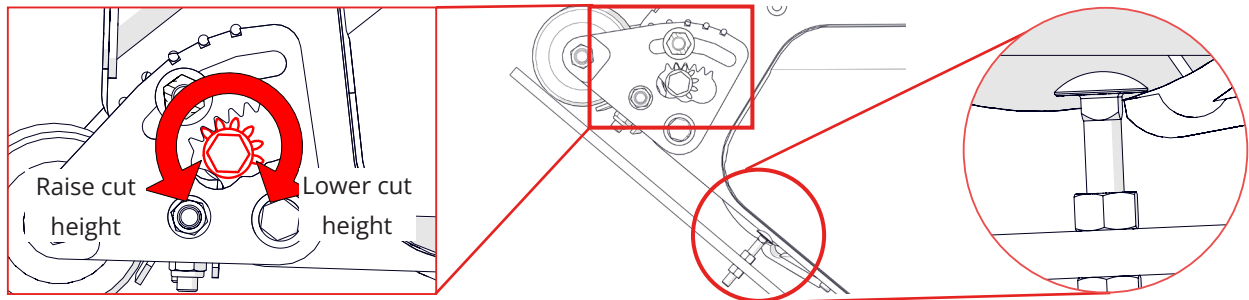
F - Rotate the toothed gear while offering up the setting bar. Stop when the head rests level/within the shear blade
